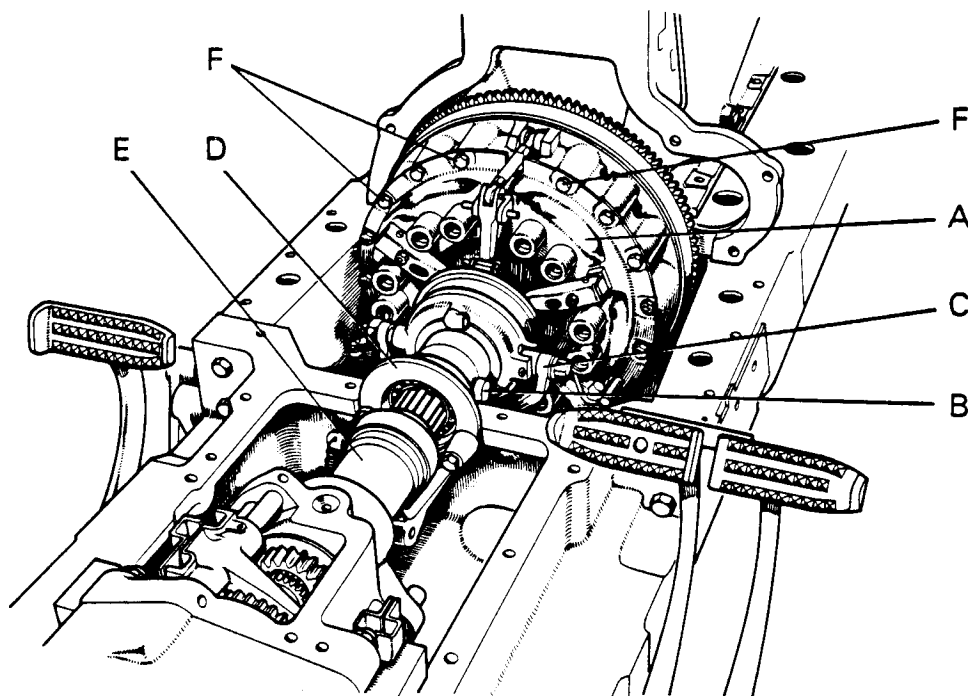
1200 TRACTOR WITH CLUTCH HOUSING AND GEARBOX COVER REMOVED
